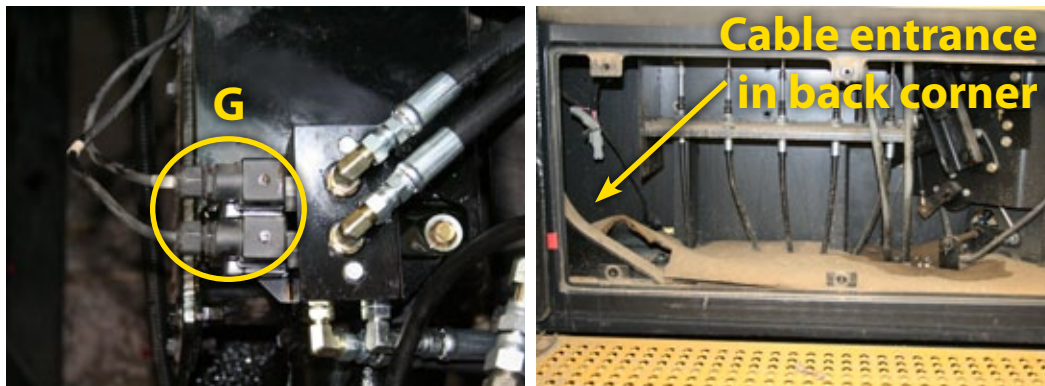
Install Steering Disengage Switch (Kit 91-07011)
